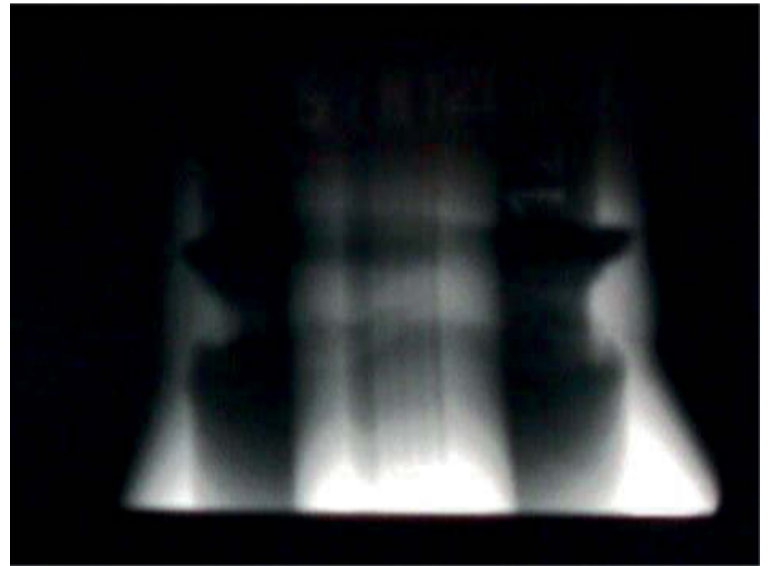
Severe corrosion in the heat affected zones of a weld-o-let.
